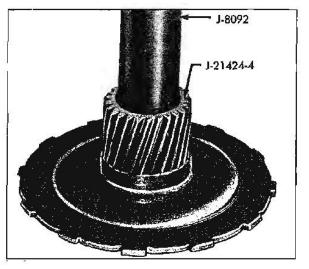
Installing Clutch Piston Inner Oil Seal
